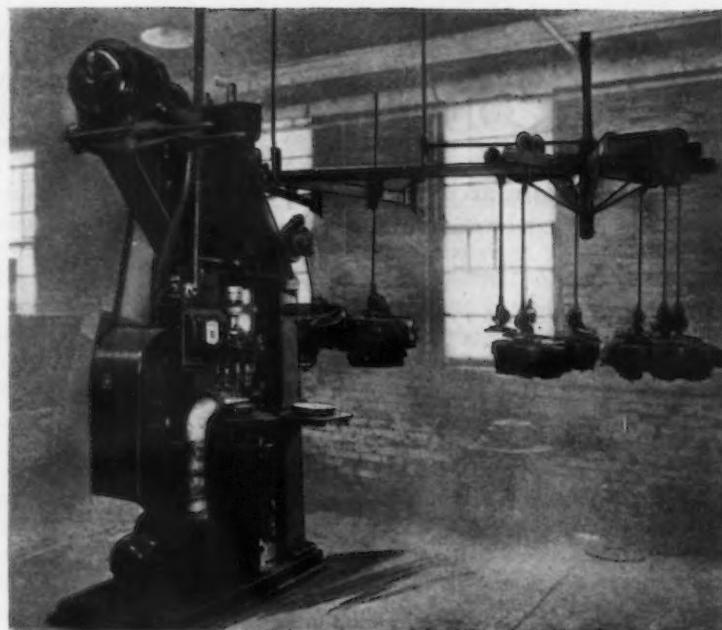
A specially designed drilling machine drills 16 1-in. holes at rate of 1-in. per second. Drill heads are handled as shown
